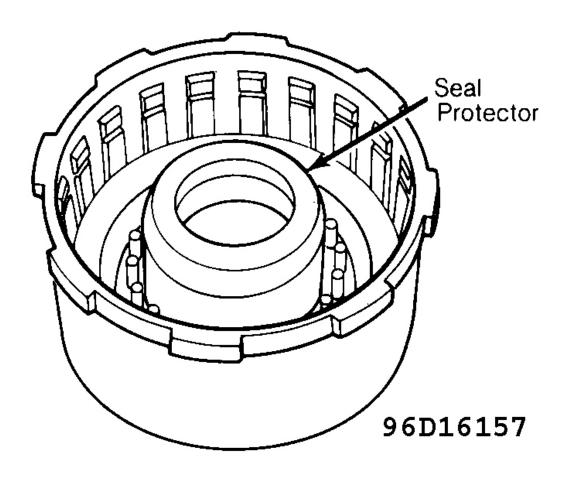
Positioning of Seal Protectors for Forward Clutch Piston Installation Courtesy of FORD MOTOR CO.
